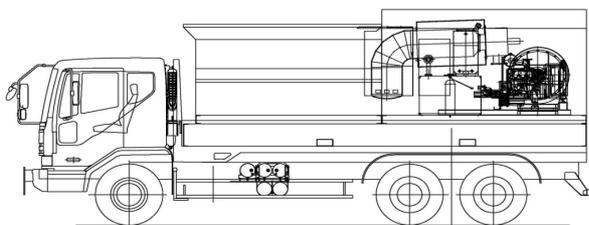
Truck (16 ton) with melting equipment(Lee, Park, Choi, Bang, and Kim, 2011)
